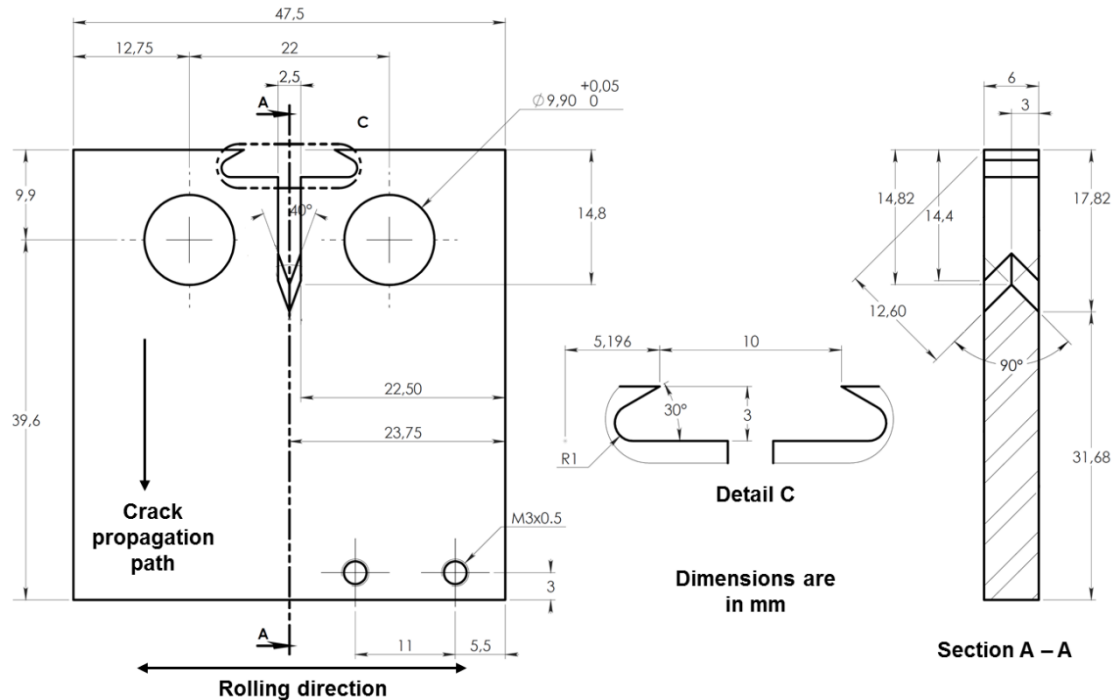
Detailed drawing of a CT sample used for fatigue crack propagation testing of steel weld joints under ASTM E647 – 13ae1 test standard.
